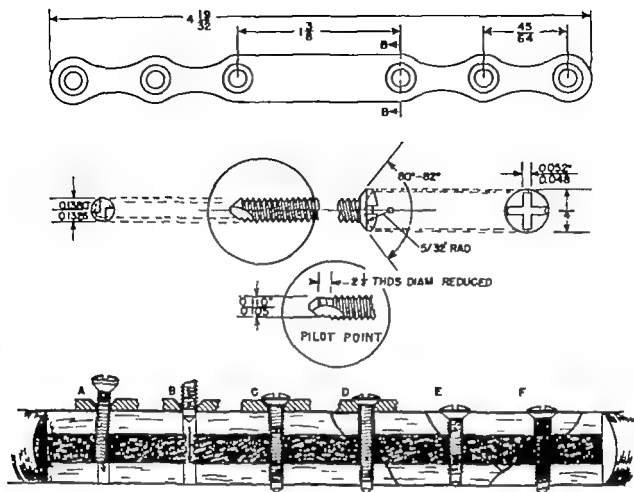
Details of construction of plates and screws (18-8 S.Mo stainless steel) Inset shows the cruciate head the cutting flutes and the pilot point of the screw The lower drawing shows the technique in plate and screw fixation
